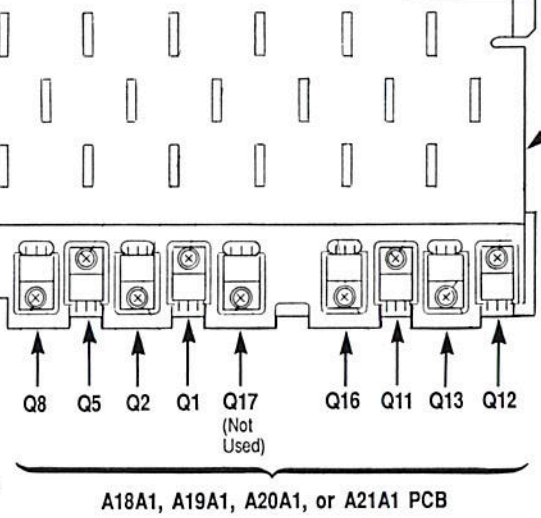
L-2. A18, A19, A20, or A21 YIG Driver PCB Parts Locator Diagram
